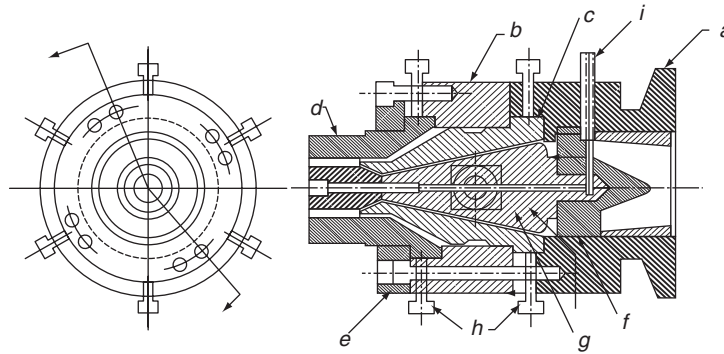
Offset pipe die: (a) Die head, (b) Adapter, (c) Mandrel, (d) Die bush, (e) Die ring.
